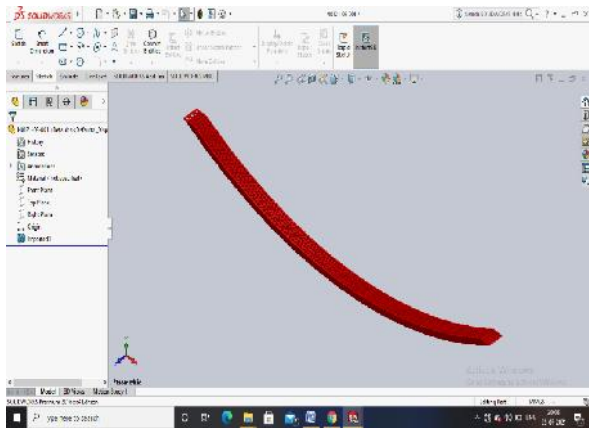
Middle Layer of Aluminum Honeycomb & Figure 22: Assembly of Leaf Spring
